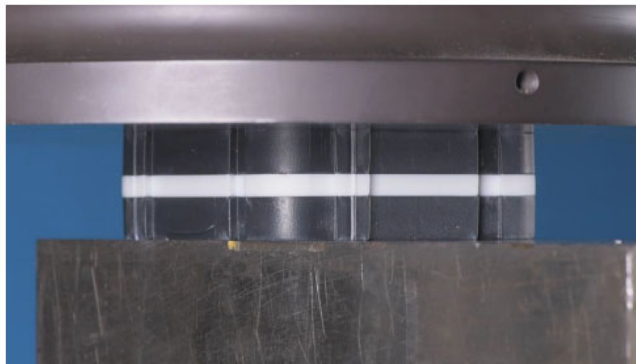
Photo of TWI Test 4 | under 143.8kN Load
